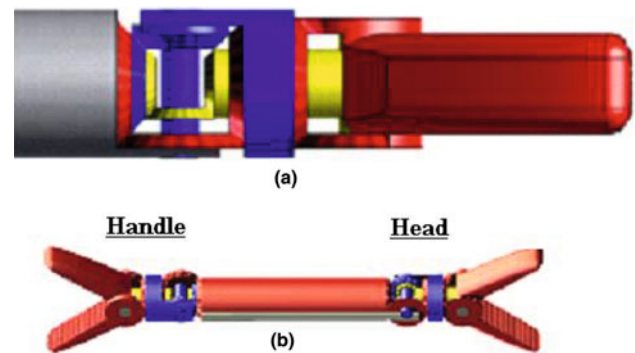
(a) Basic concept of triple bevel gear mechanism, (b) Basic concept of double head mechanism
